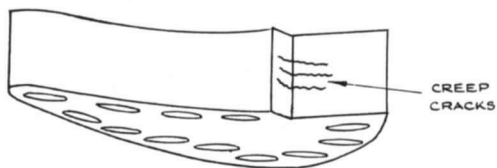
Spanwise cracks observed at root, mid-span and tip sections of bent blade.
